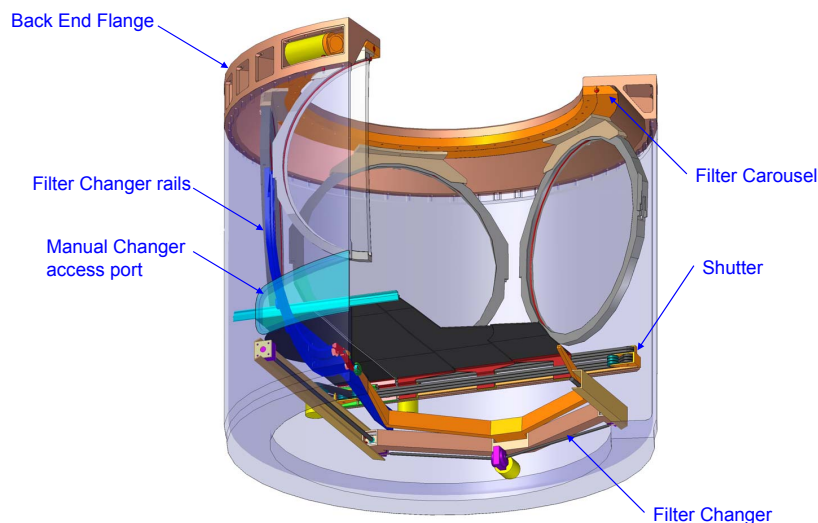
A schematic of the camera body showing the filter exchange mechanism, the large optical filters, and the shutter assembly
